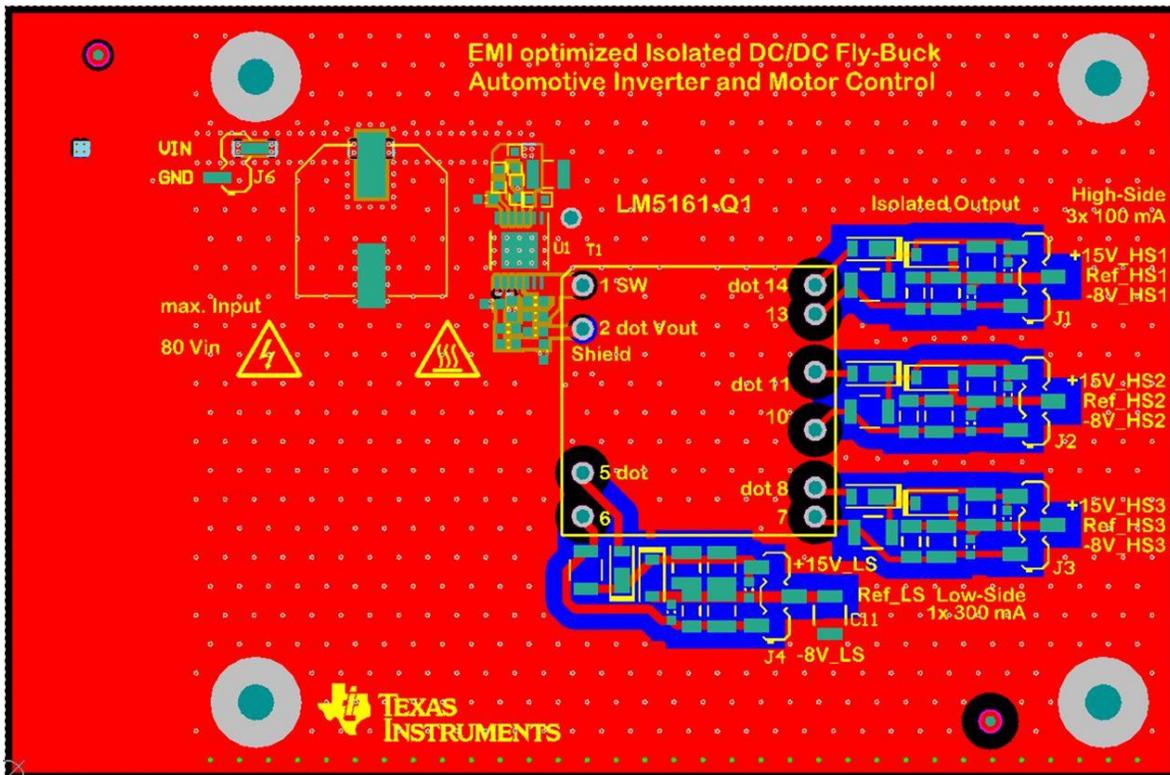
48-V Flyback IGBT Supply Design: Layout – Top Layer (red)
